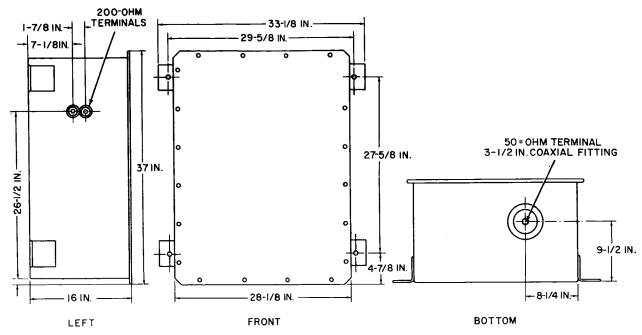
COAXITRAN 512F-1 OUTLINE AND MOUNTING DIMENSIONS
